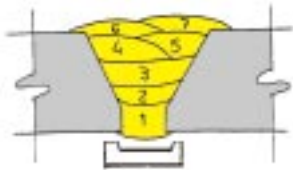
Vertical weld between corrugated tank walls; mechanised welded with OK Tubrod 14.27
